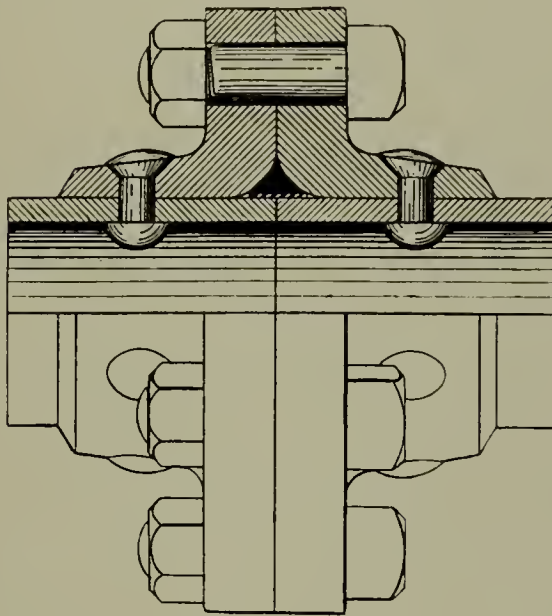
RIVETED FLANGES BOLTED TOGETHER WITH A GASKET BETWEEN THEM
